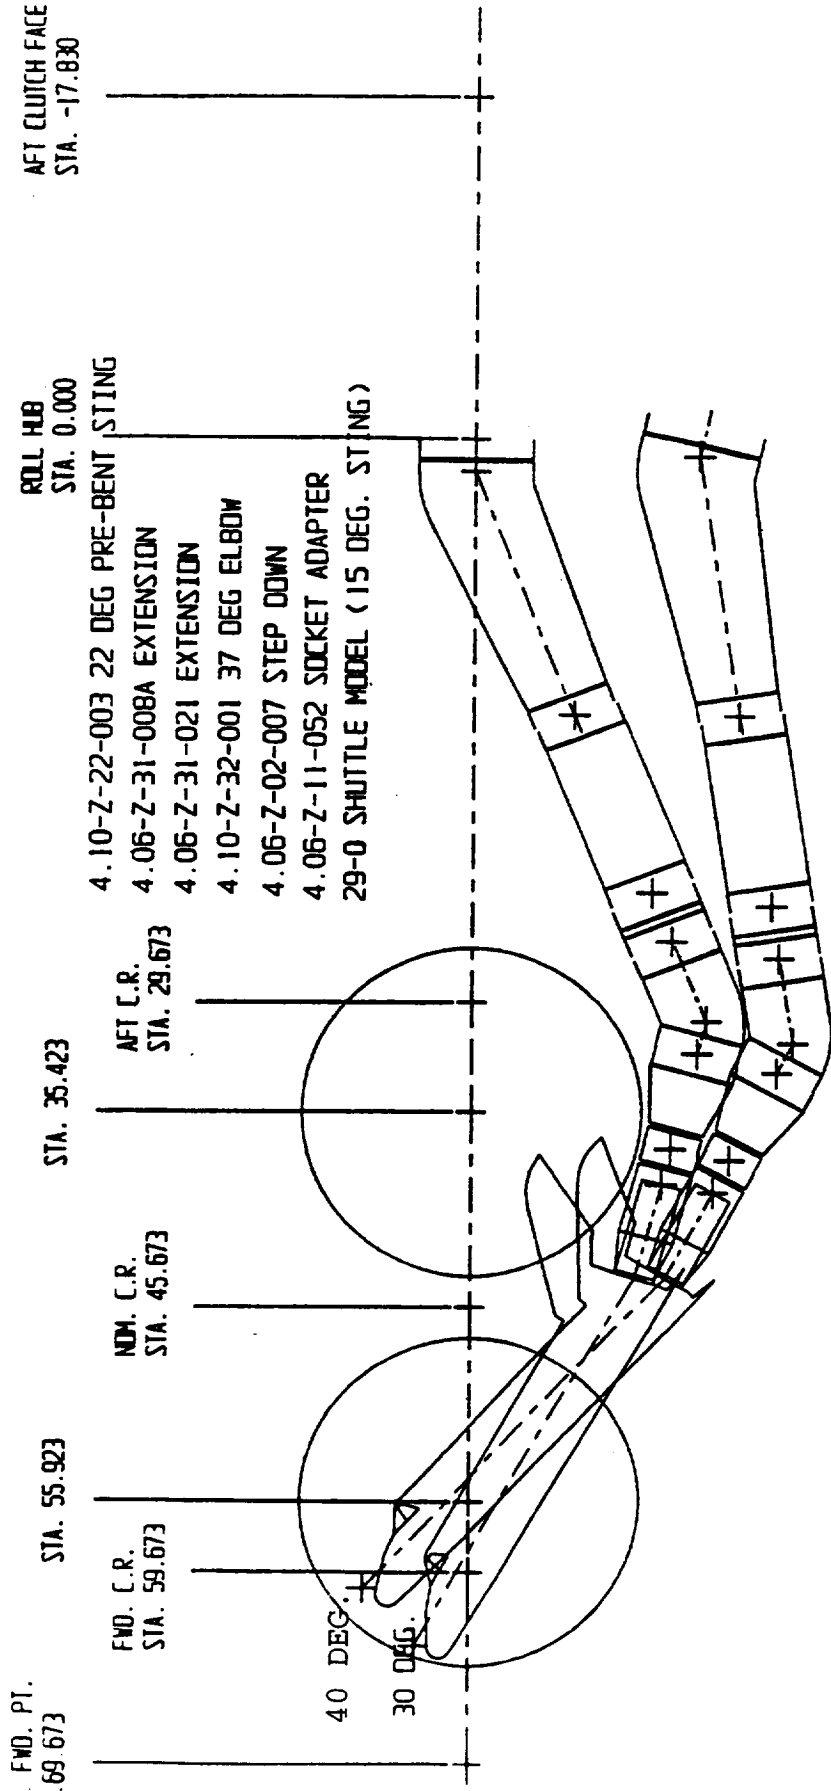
Installation Sketch of the Original Model Position Within the AEDC Tunnel B Test Section
